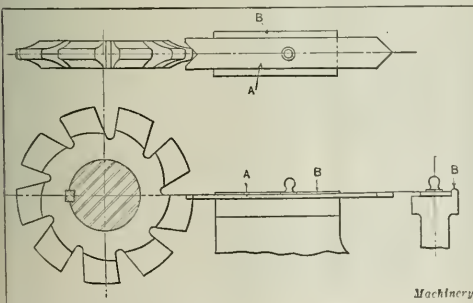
One Type of Gage used to center Cutter Relative to Gear Blank
